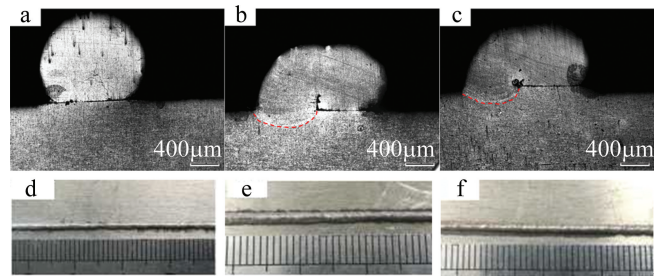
Weld cross section and surface topography in different distance between laser beam and wire conducted by double beam laser in parallel mode
